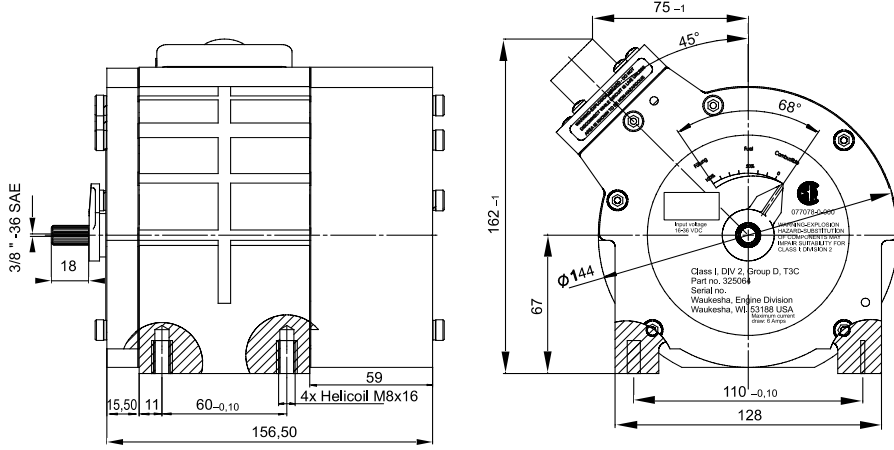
Dimensional drawing StG 2040.XX-SV-PD
